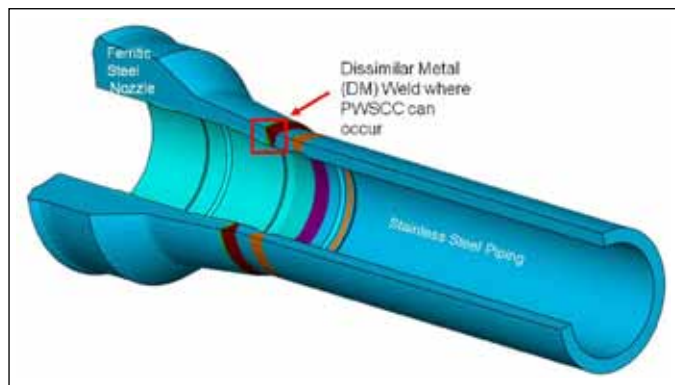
Cutaway view of a carbon steel nozzle DM weld and stainless steel piping typical in a light-water cooled nuclear power plant
